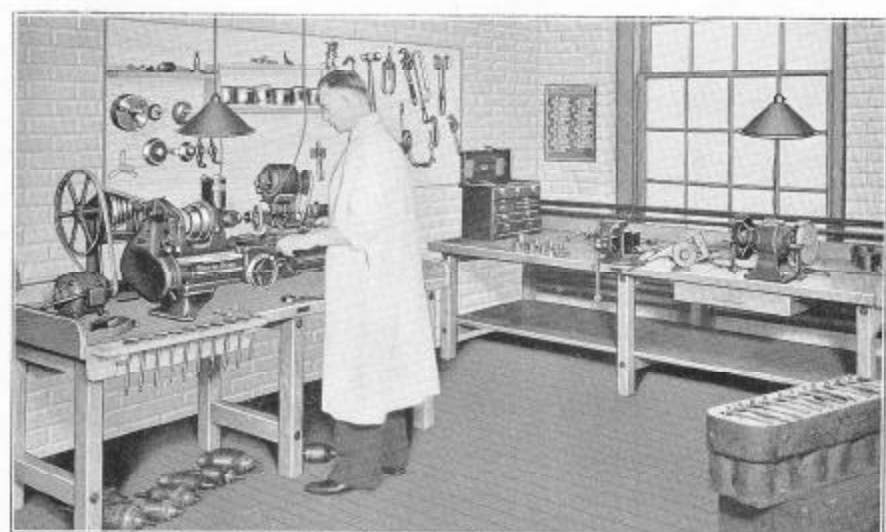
The No. 9 Auto Service Shop Equipped with Lathe and Equipment for Servicing Valves, Pistons, Armatures, Bushings, Connecting Rods, etc.
